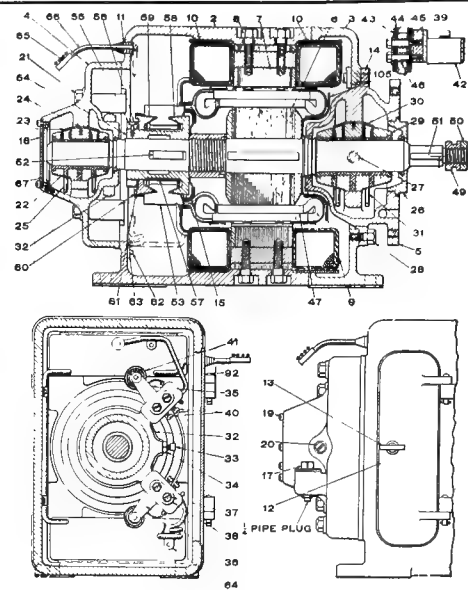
Motor Portion of Motor Driven Air Compressor for Electric Cars.
